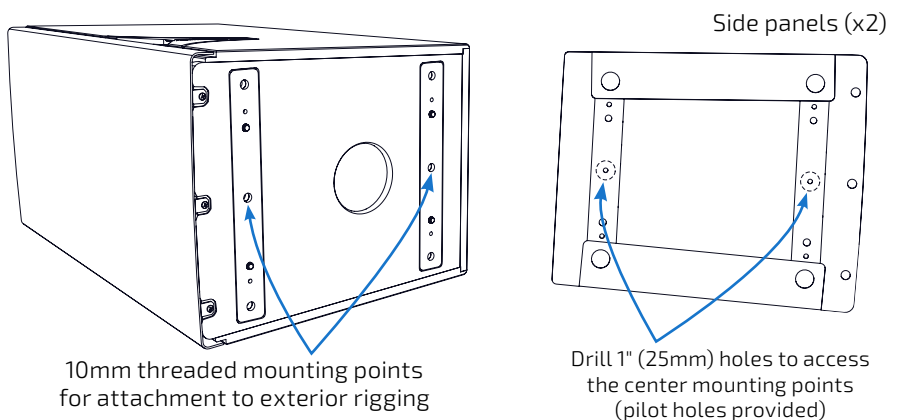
The side panels must be drilled at each center mounting point on IV6-WR cabinets for attachment to customized external rigging.
